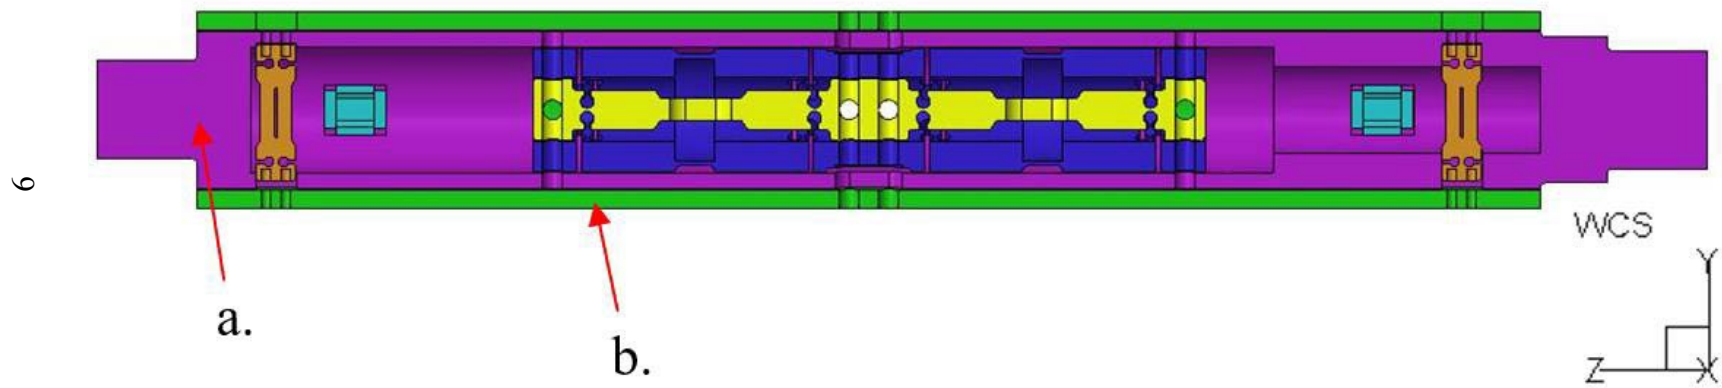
CAD geometry of cross-sectional view of force balance with exterior components. (to be continued)
